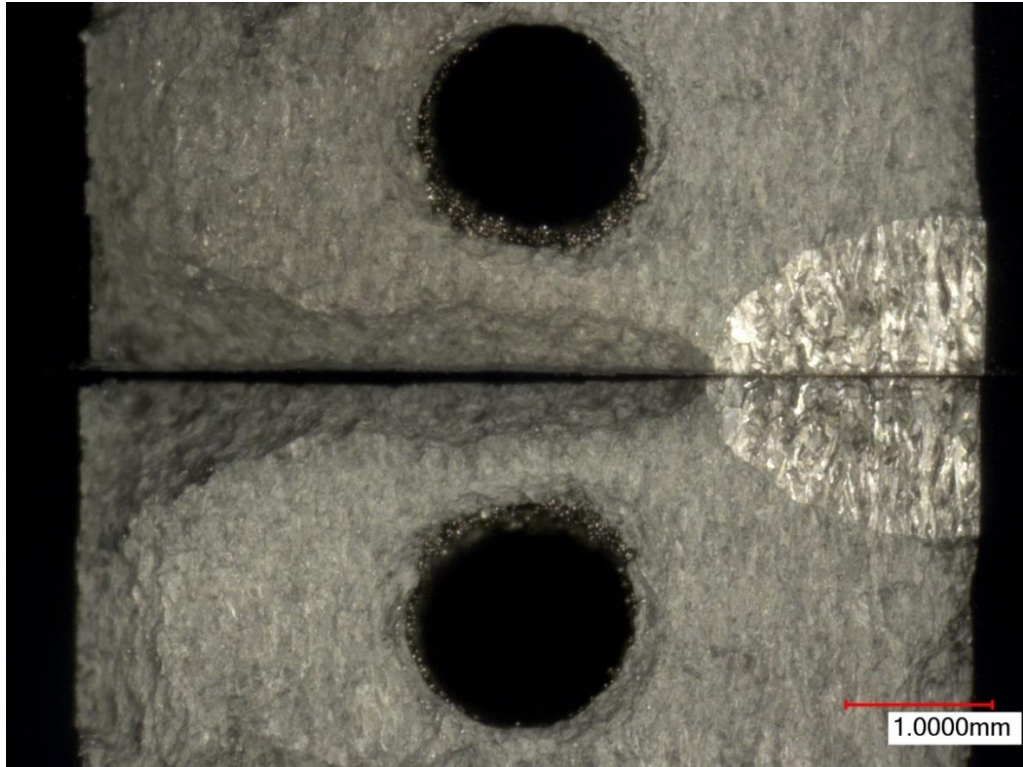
Specimen A2 fracture surface (500,000 cycles : 64.14 ksi / 442.3 MPa)
